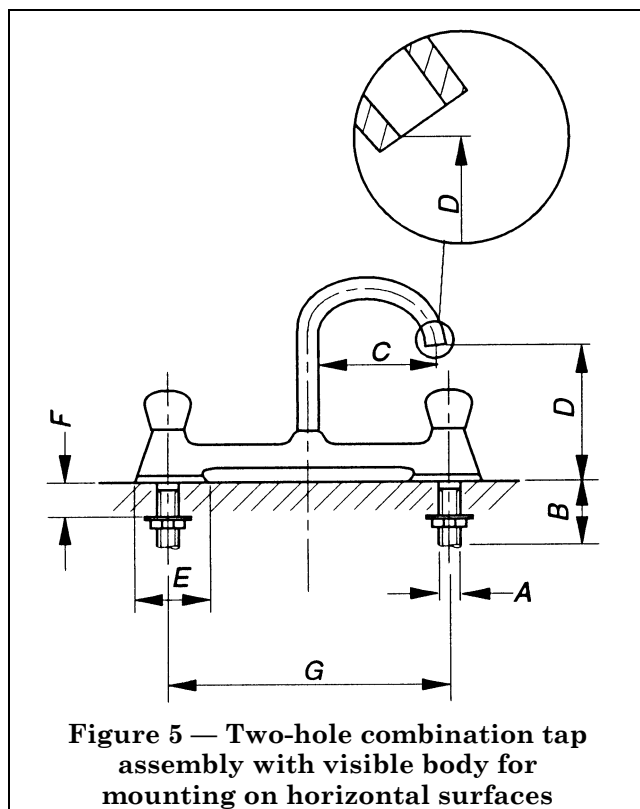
Two-hole combination tap assembly with visible body for mounting on horizontal surfaces
